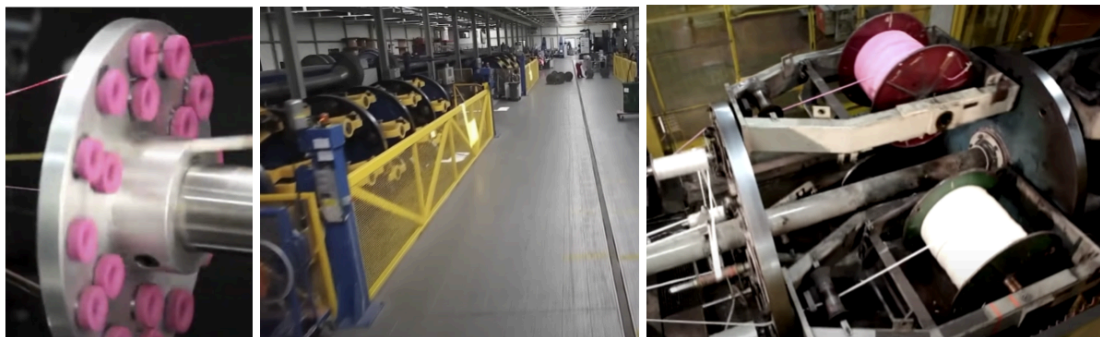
Stranding machine elements. Left to right: grommets [9], wire cage [10], bobbins [8]
